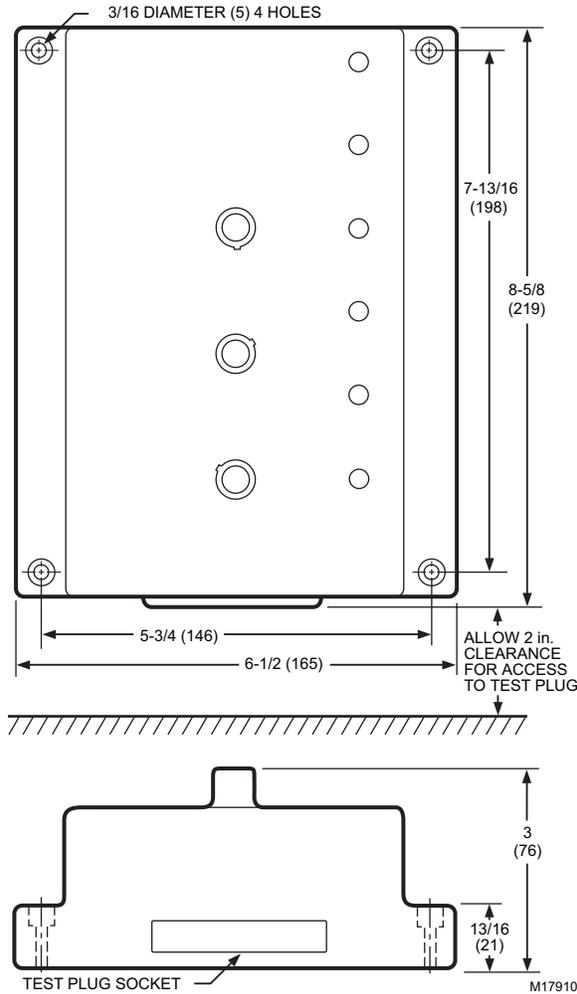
W7100 Discharge Air or Water Controller mounting dimensions in in. (mm).
